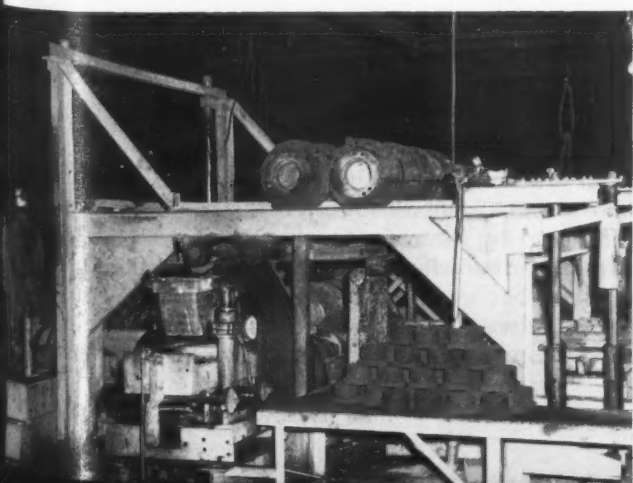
Front view of centrifugal casting machine showing mold opening and closing station.
